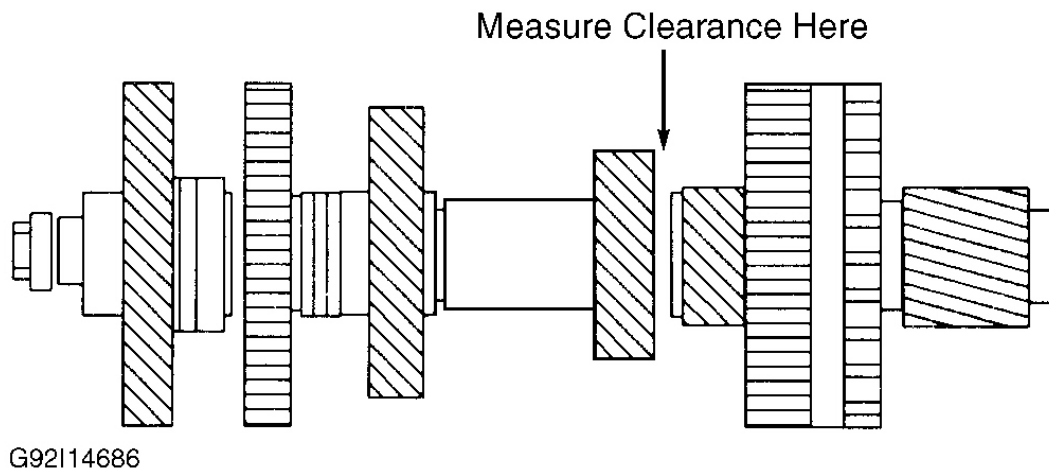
Checking 3rd Gear-To-Thrust Washer Clearance
